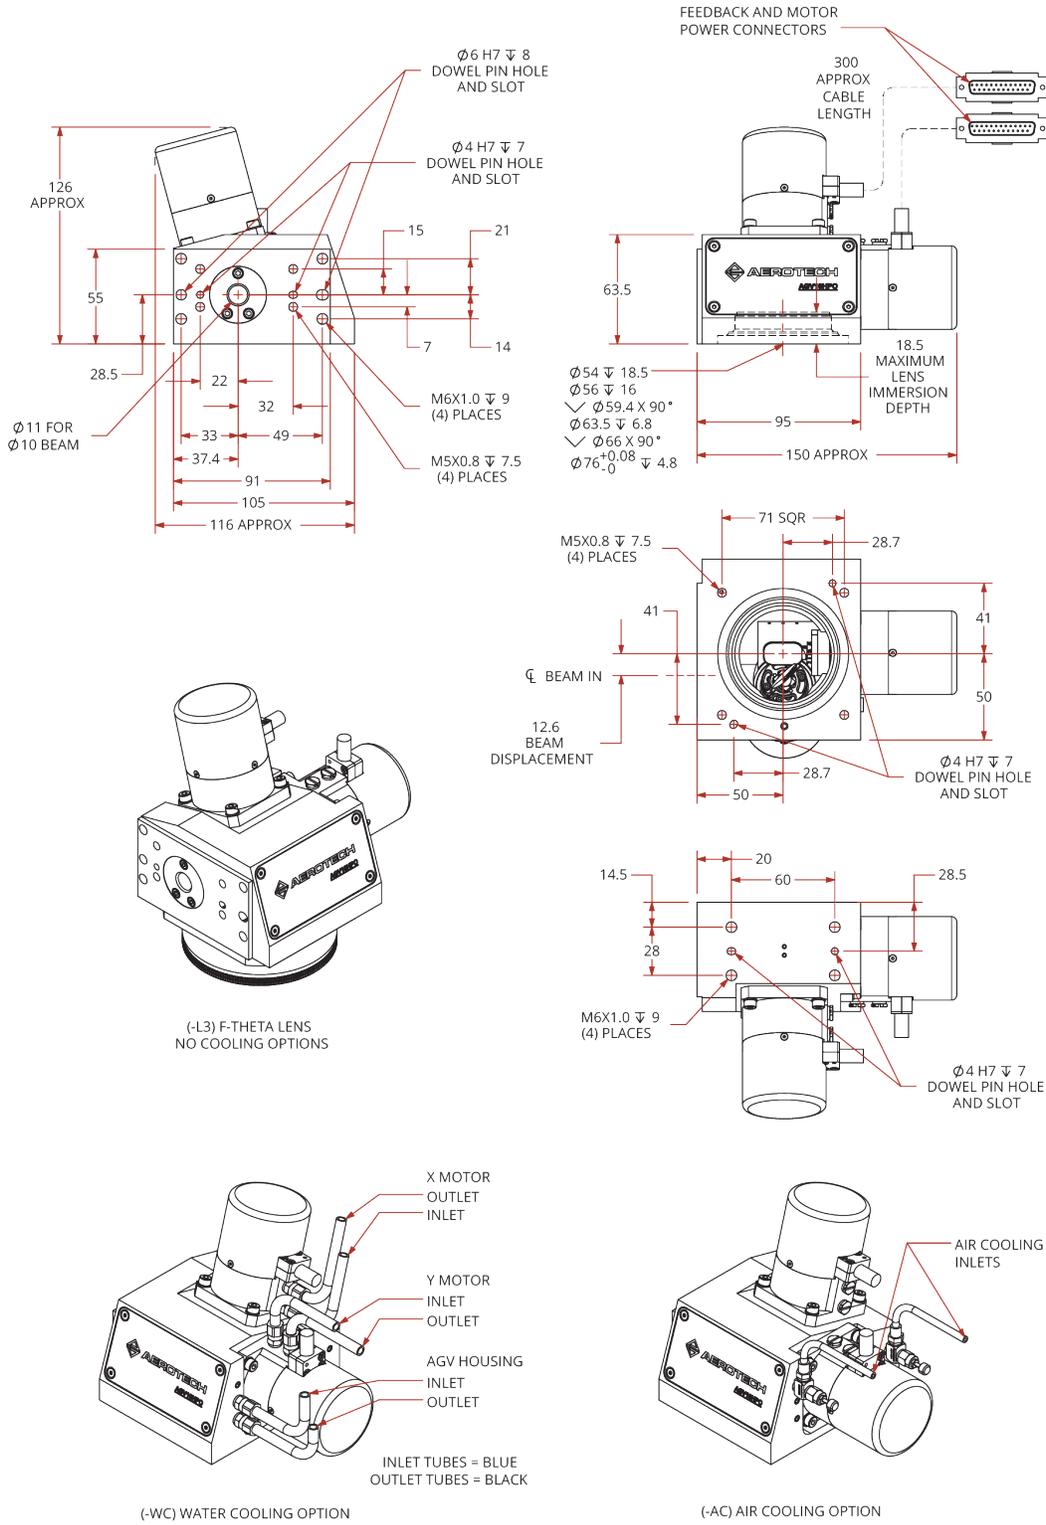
AGV10HPO-BE1 Galvanometer Scanner Dimensions
